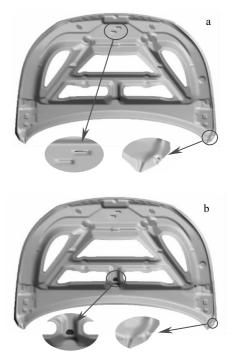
Forming defects caused by irrationality of processing parameters: (a) crack and (b) trend of wrinkle and crack
